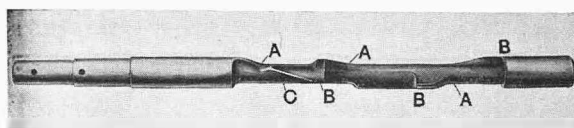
The inlet valve camshaft of the Miesse motor.
